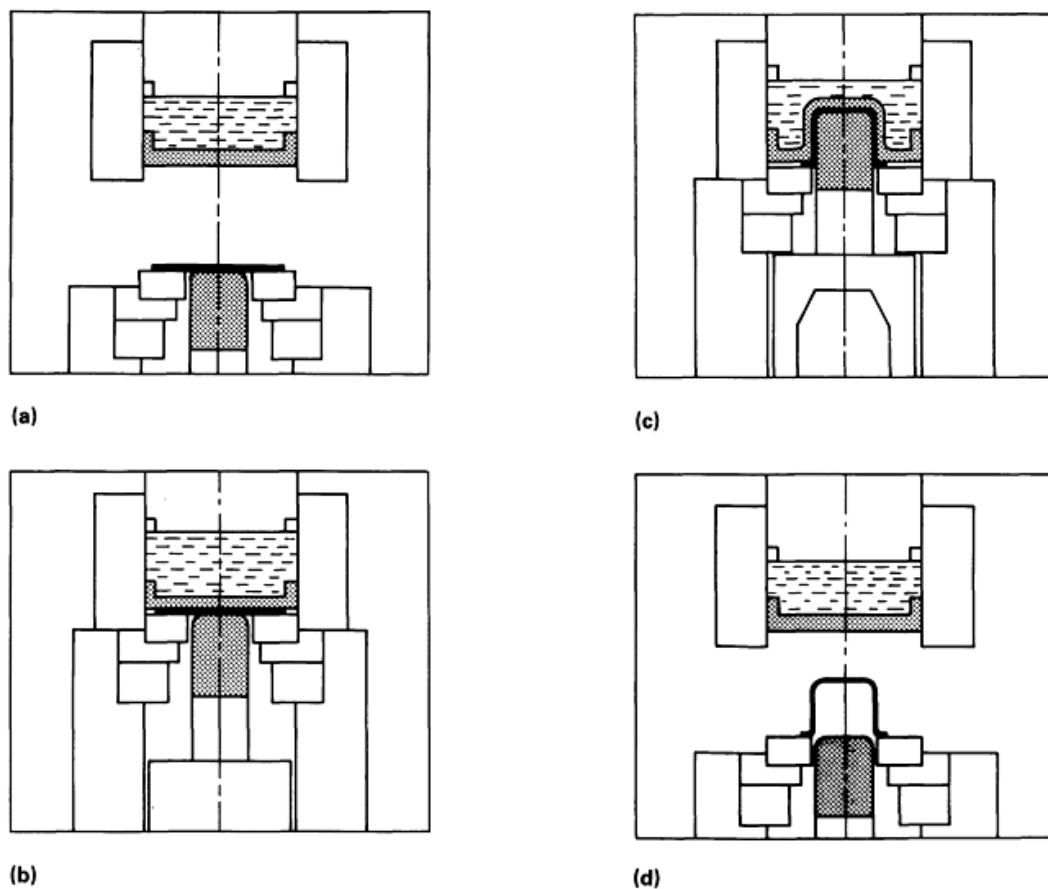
The deep drawing process using the fluid-forming press: (a) the blank is placed on the blankholder; (b) the outer ram moves upward, carrying the blank; (c) oil is pumped into the inner ram system, pressing the punch upward; (d) outer ram is returned to its initial position, and the punch is retracted to allow removal of the formed part.
